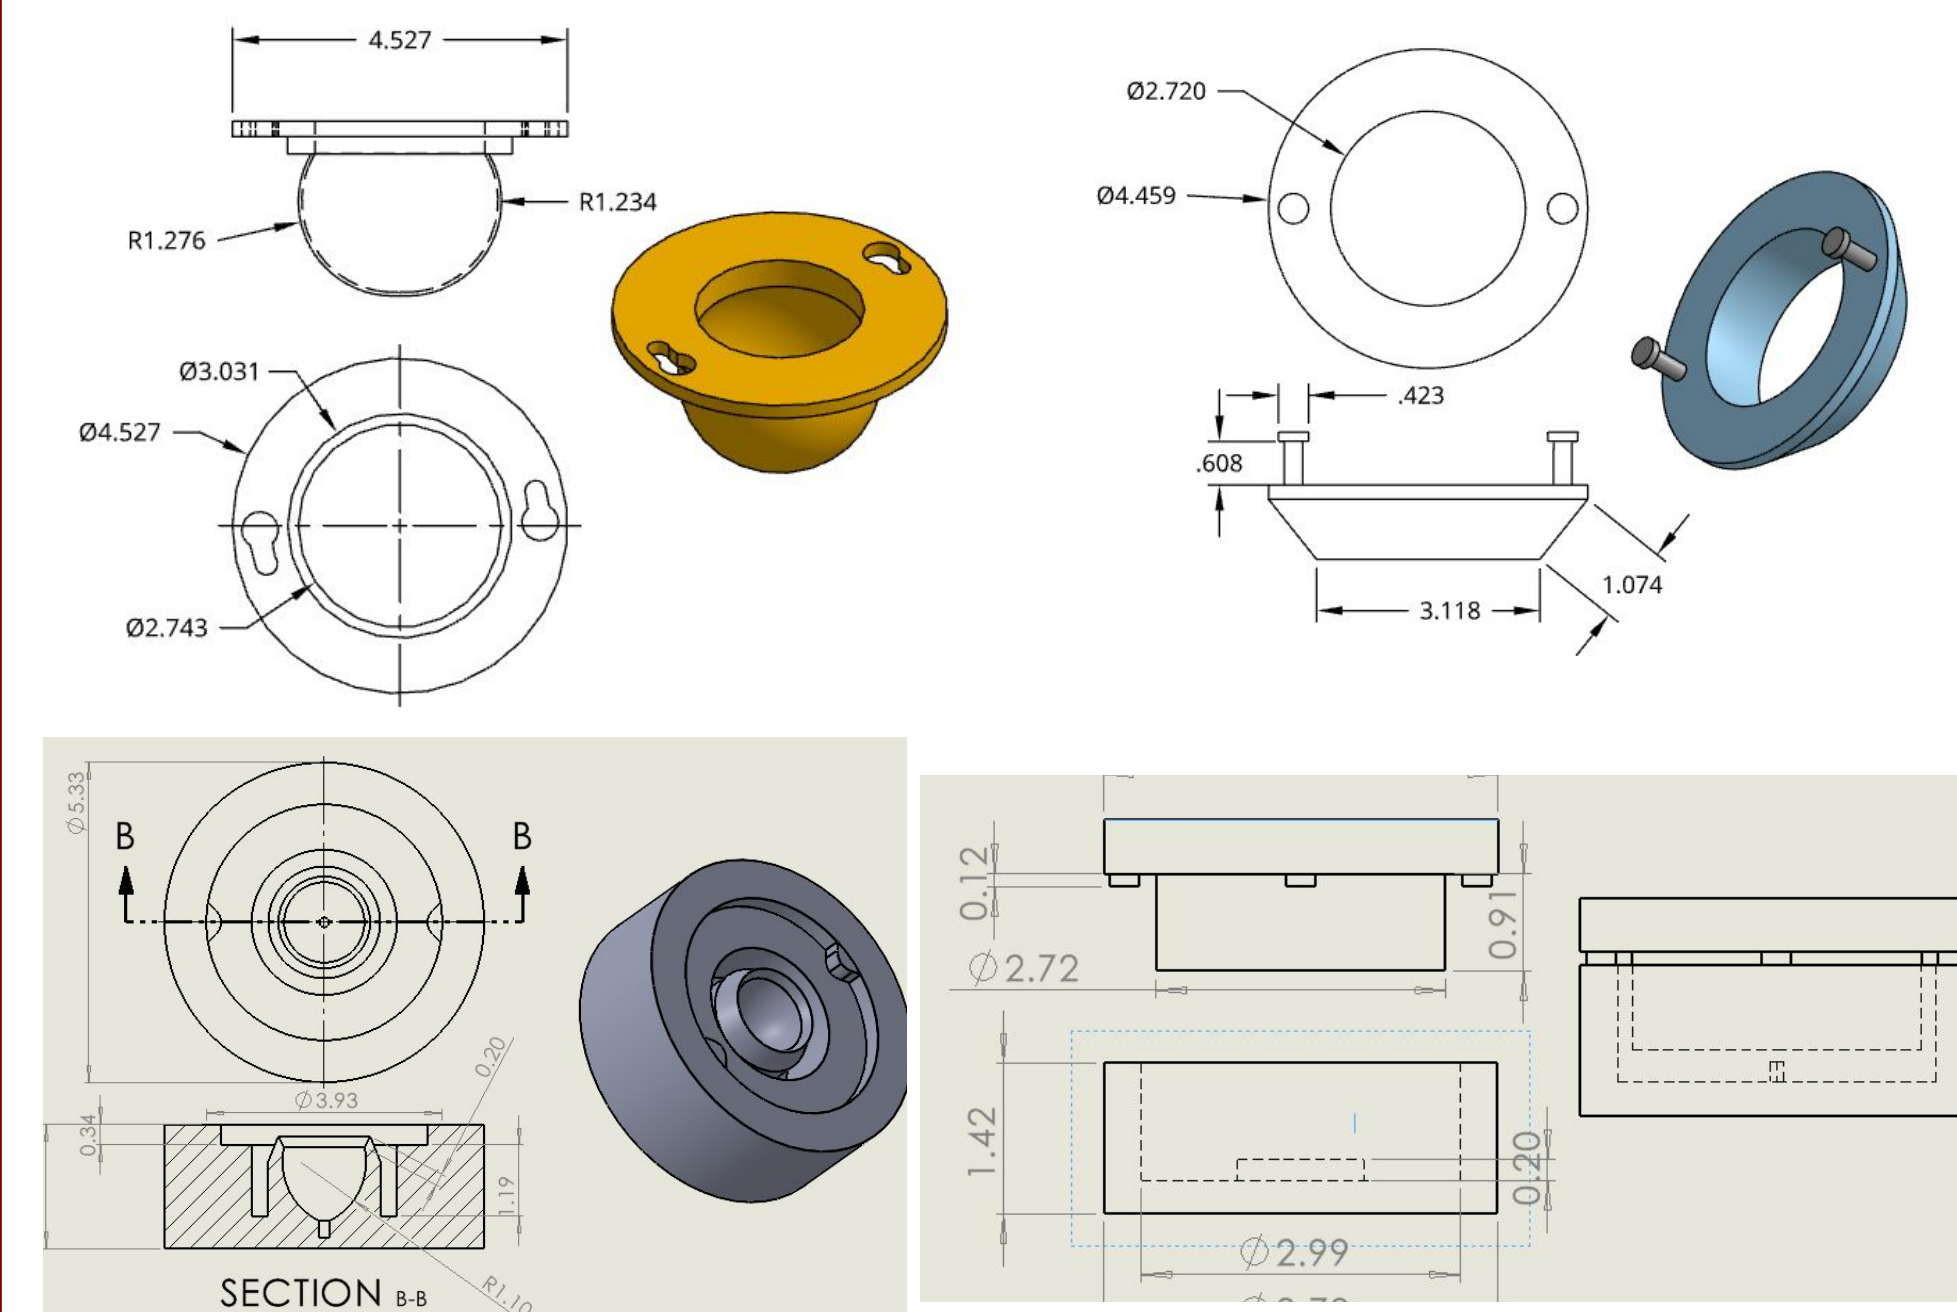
SolidWorks drawings of uterus, connecting piece, cervical mold, and vaginal mold
